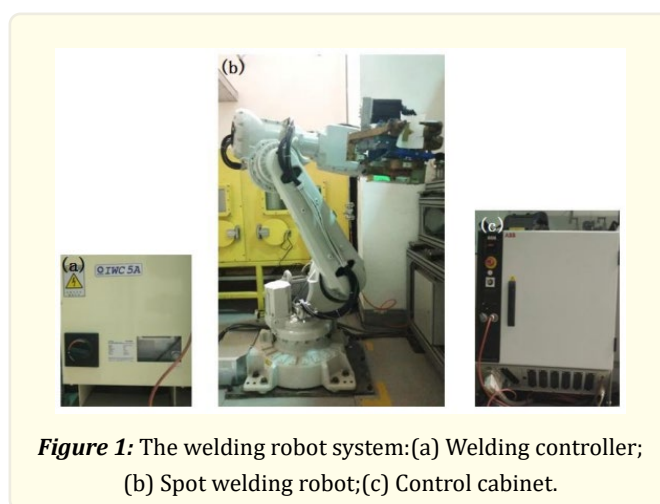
The welding robot system:(a) Welding controller; (b) Spot welding robot;(c) Control cabinet.
